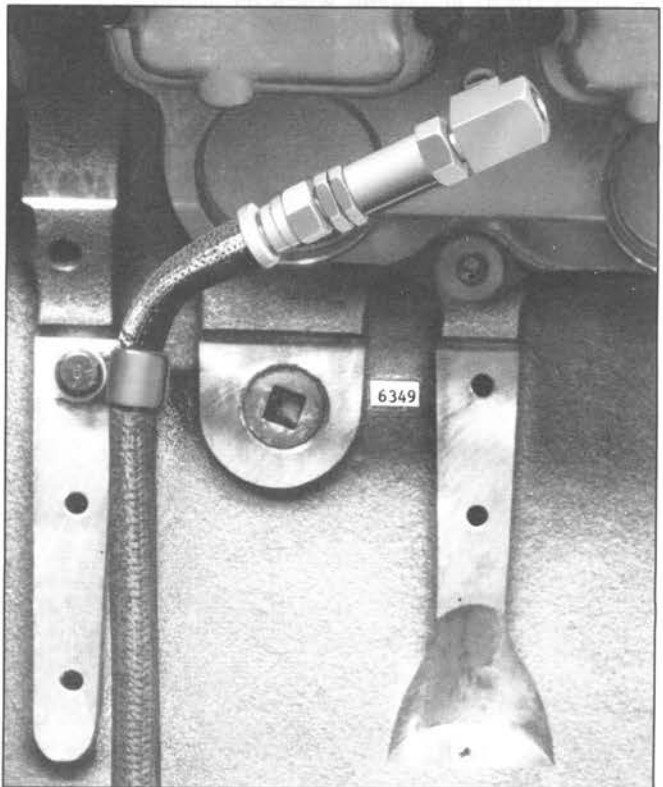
Current Open Air Box Drain Tube and Check Valve System
